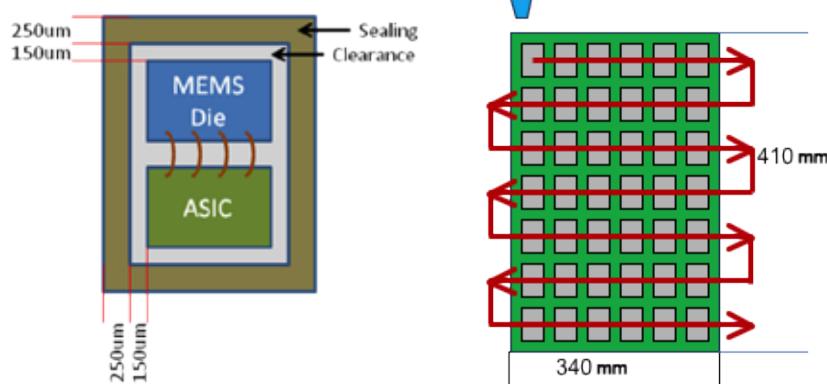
Buffer clearance and sealing line dimensions in a MEMS package.
